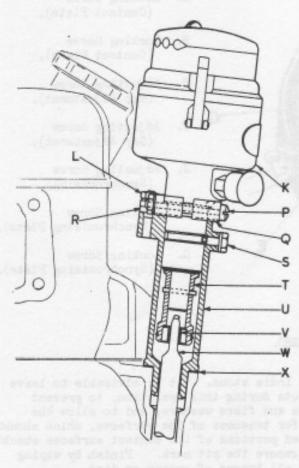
DISTRIBUTOR AND HOUSING IN POSITION.
